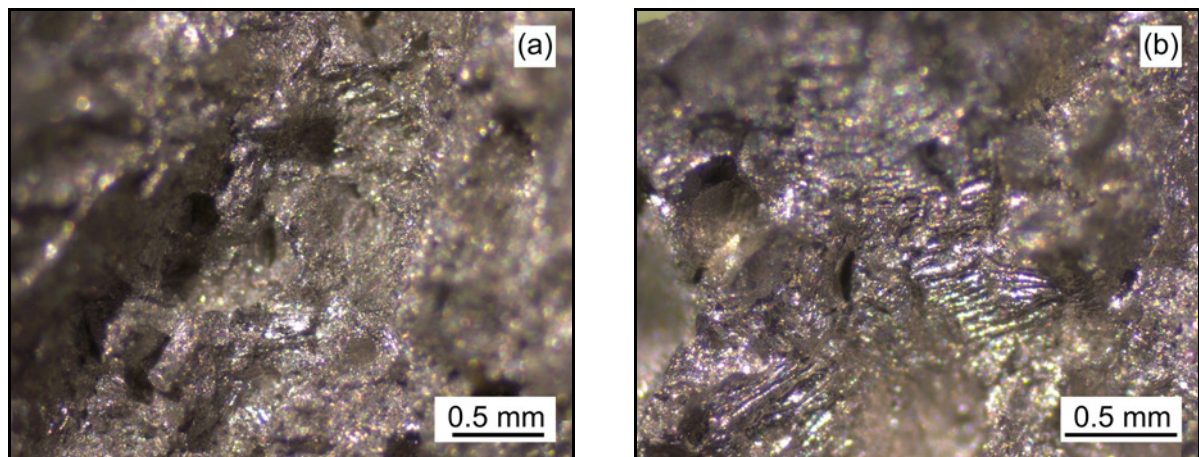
Fracture surfaces of HIP3 samples: (a) horizontally and (b) vertically built.
